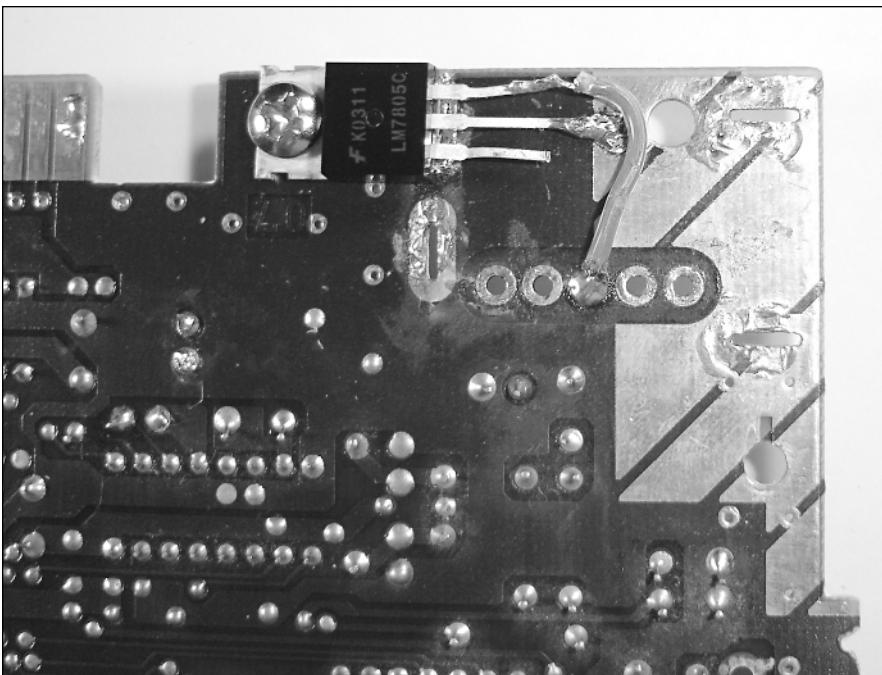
How to attach the 7805 regulator to the NES board.
